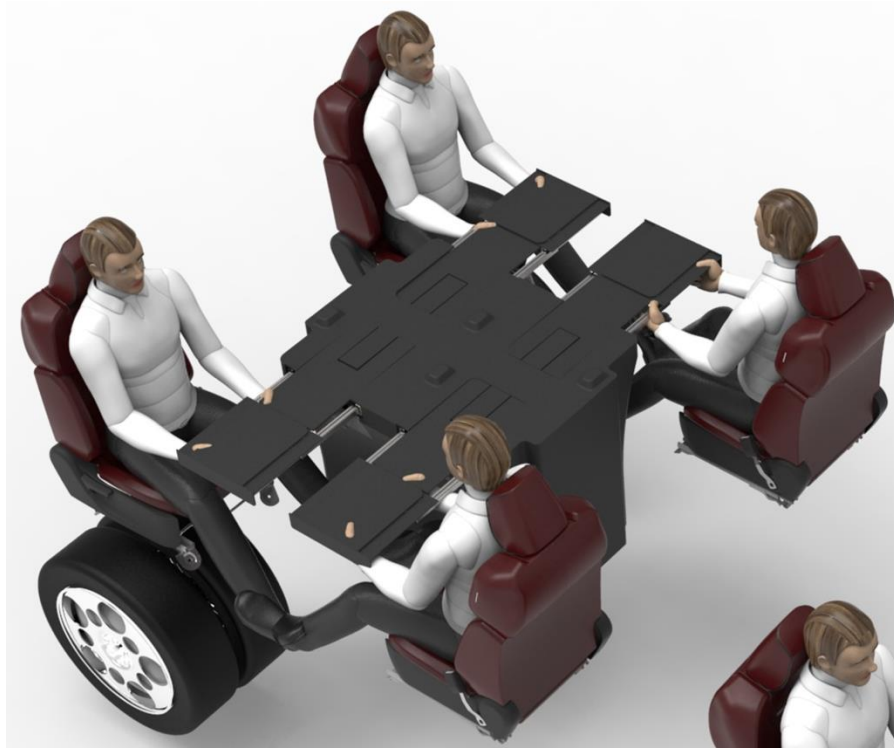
3D CAD model developed for the console with DWS mechanism product
